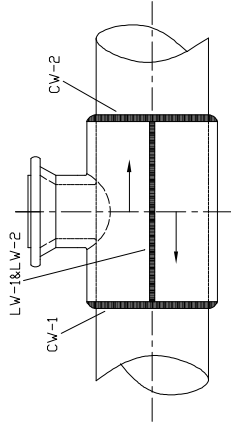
Encirclement Split Tee fitting Welding sequence
